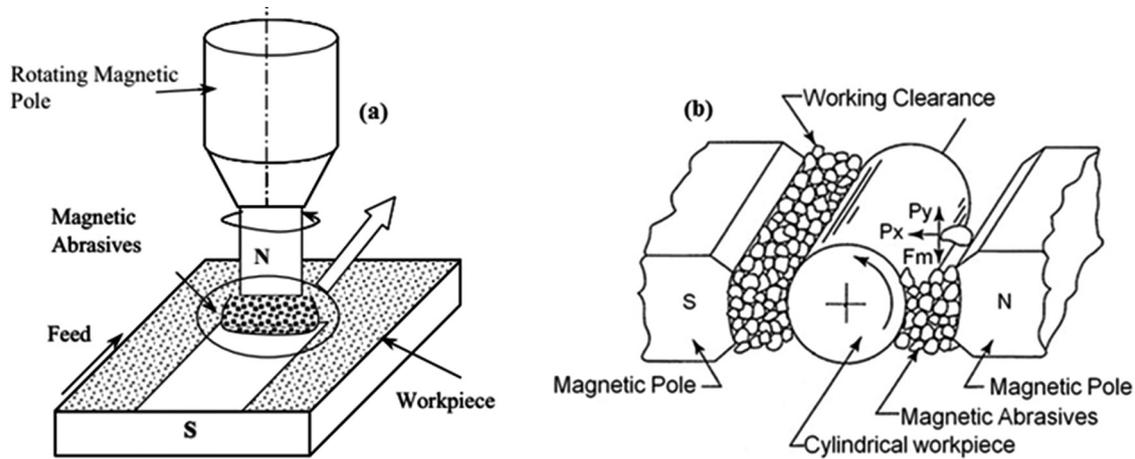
(a) Plane magnetic abrasive finishing, (b) External magnetic abrasive finishing of cylindrical work-piece [2,3].
